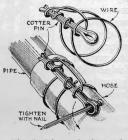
Piece of wire and cotter pin makes hose clamp in an emergency
